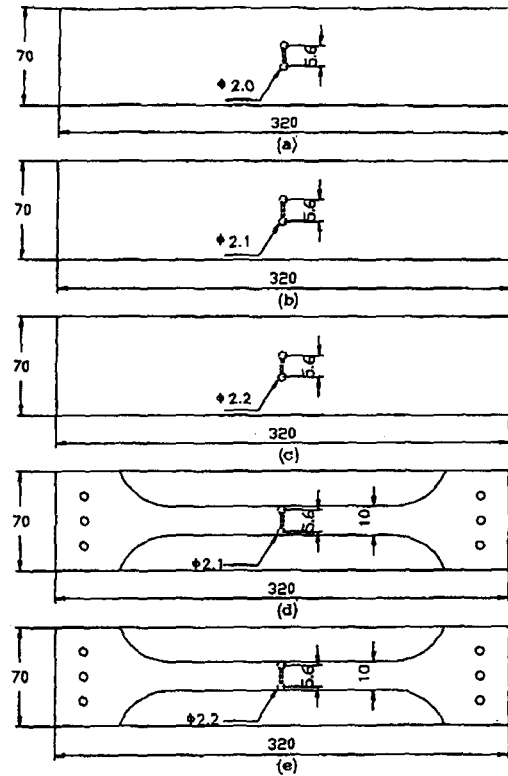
Fatigue test specimen of stop hole plate with and without cover plate (width : 10mm)
